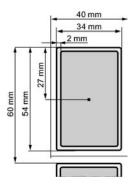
SIMATIC RF630L 6GT2810-2AB03 dimension drawing
